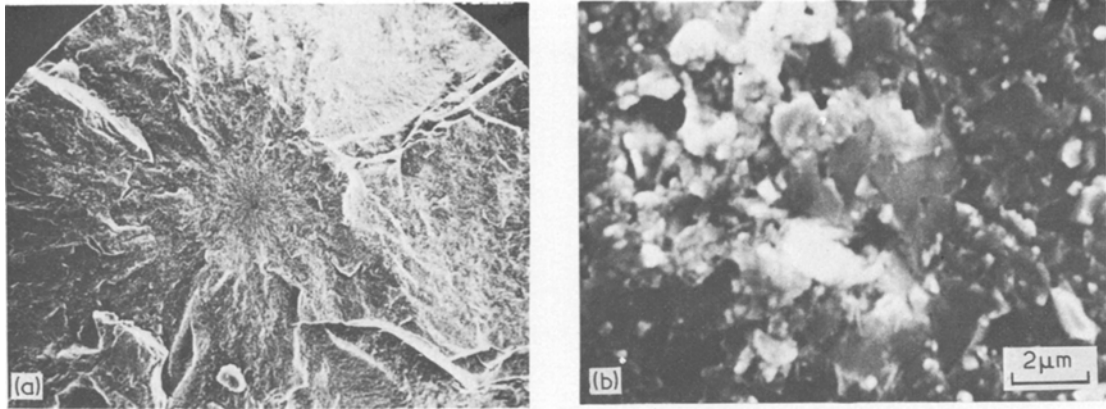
Fracture surface and internal fracture origin, specimen 2T. (a) fracture surface ( $\times 50$ ); (b) fracture origin ( $\times 4900$ ).
